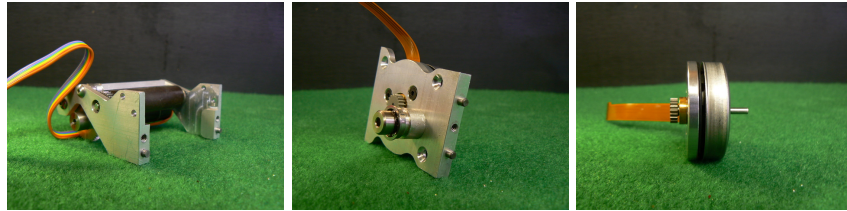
From right to left, (a) dribbler, (b) drive module, and (c) modified drive motor
